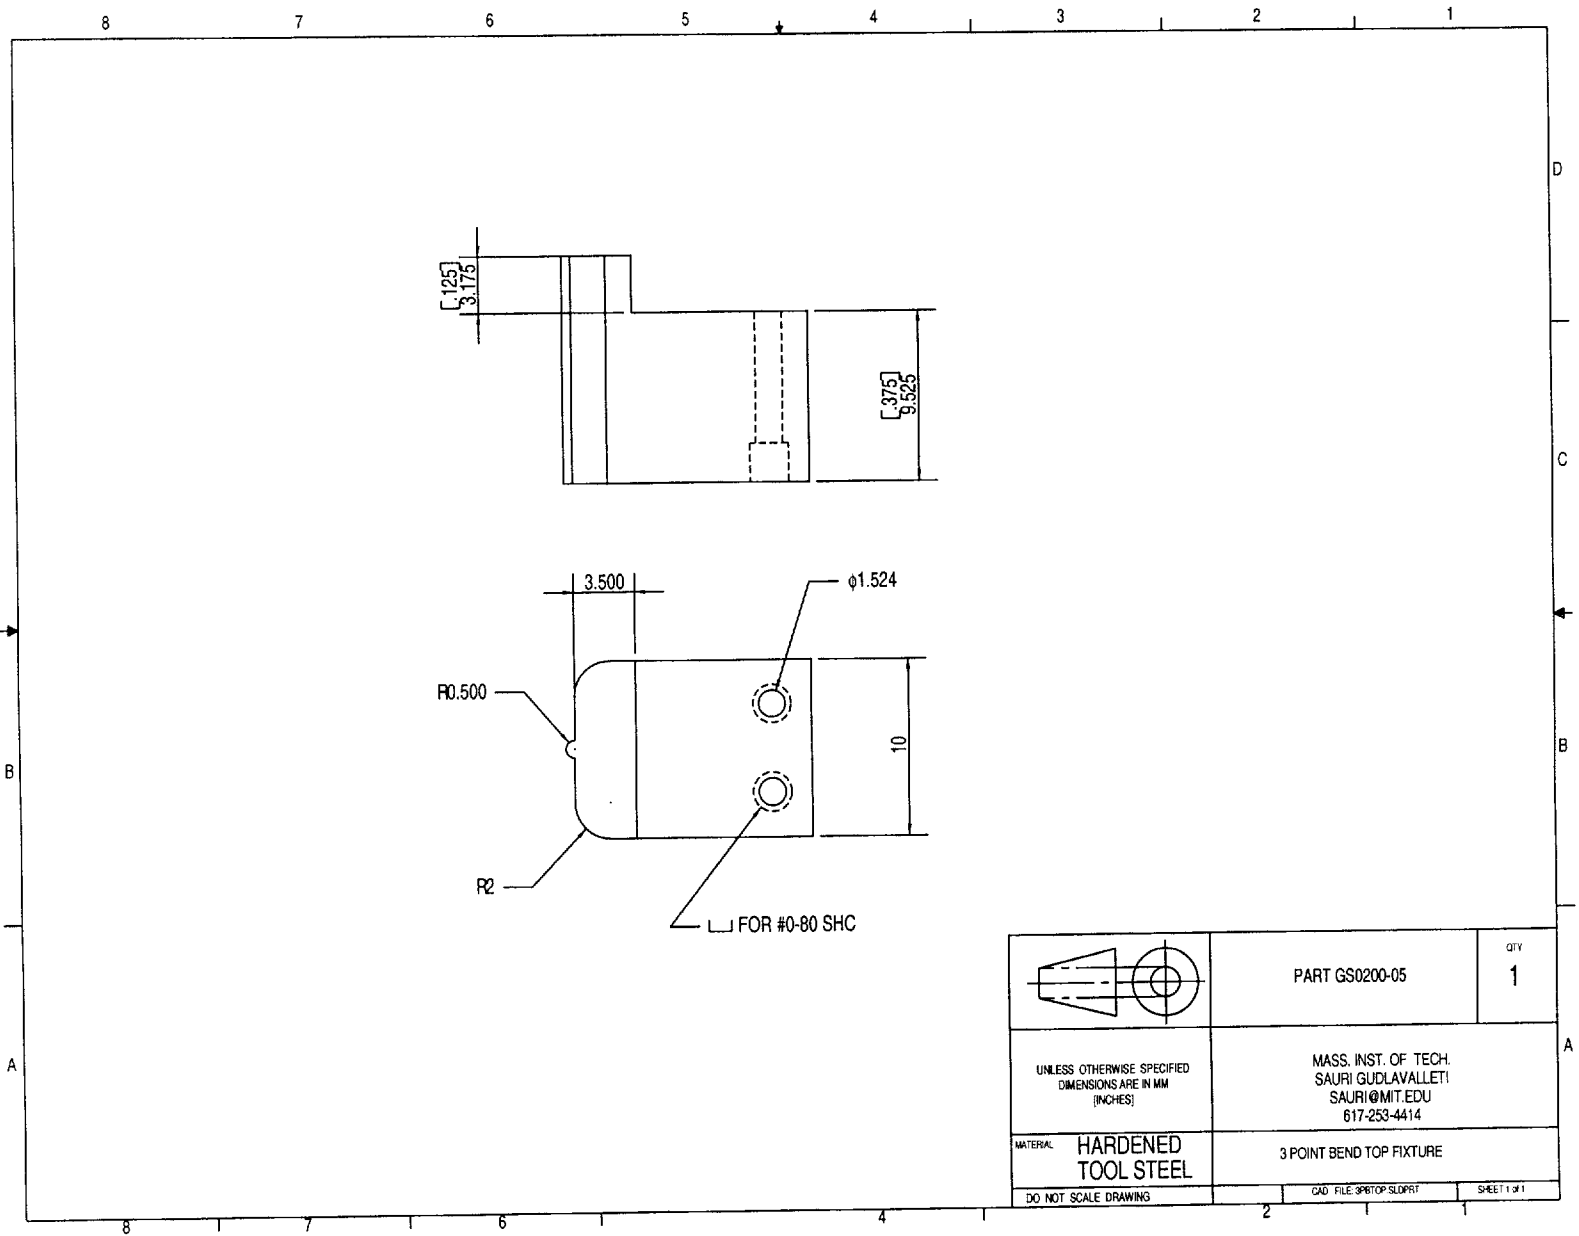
Part GS 0200-05. 3-Point Bend testing fixture. Replaced by GS1201-01
